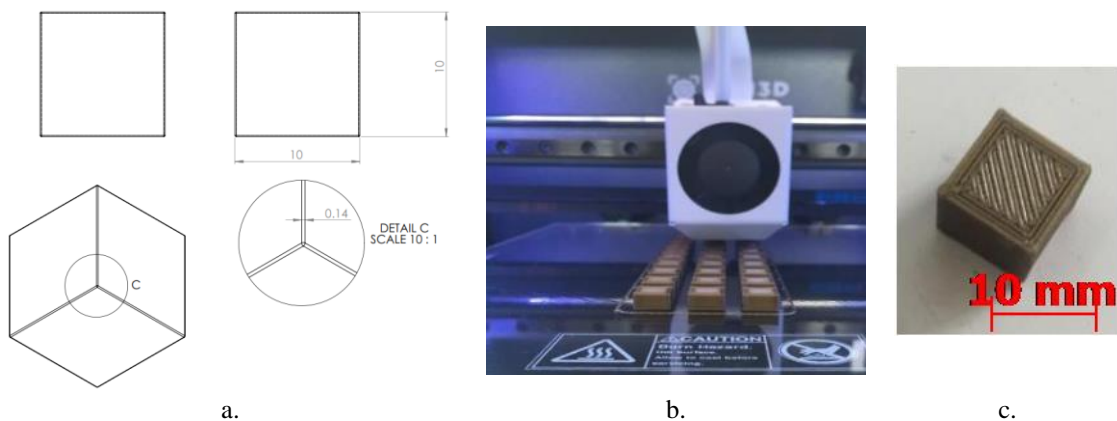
Details showing the a. CAD model, b. samples during 3D printing and c. experimental sample
